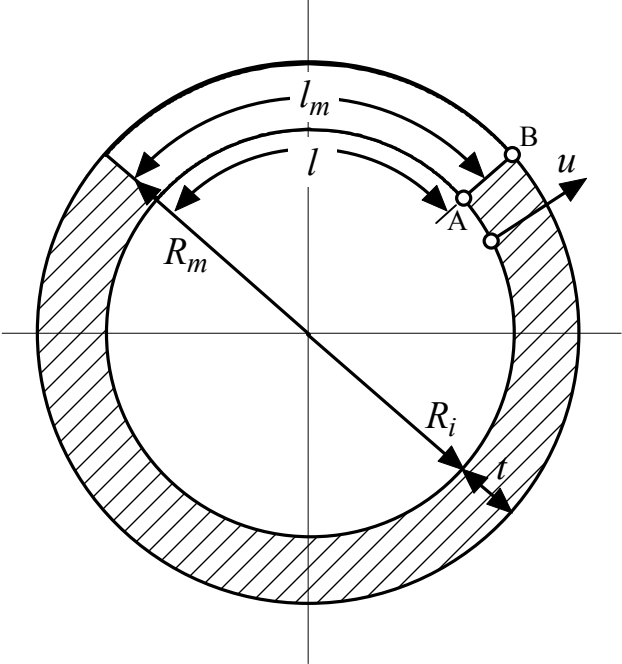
Circumferential through-thickness crack in a cylinder.
